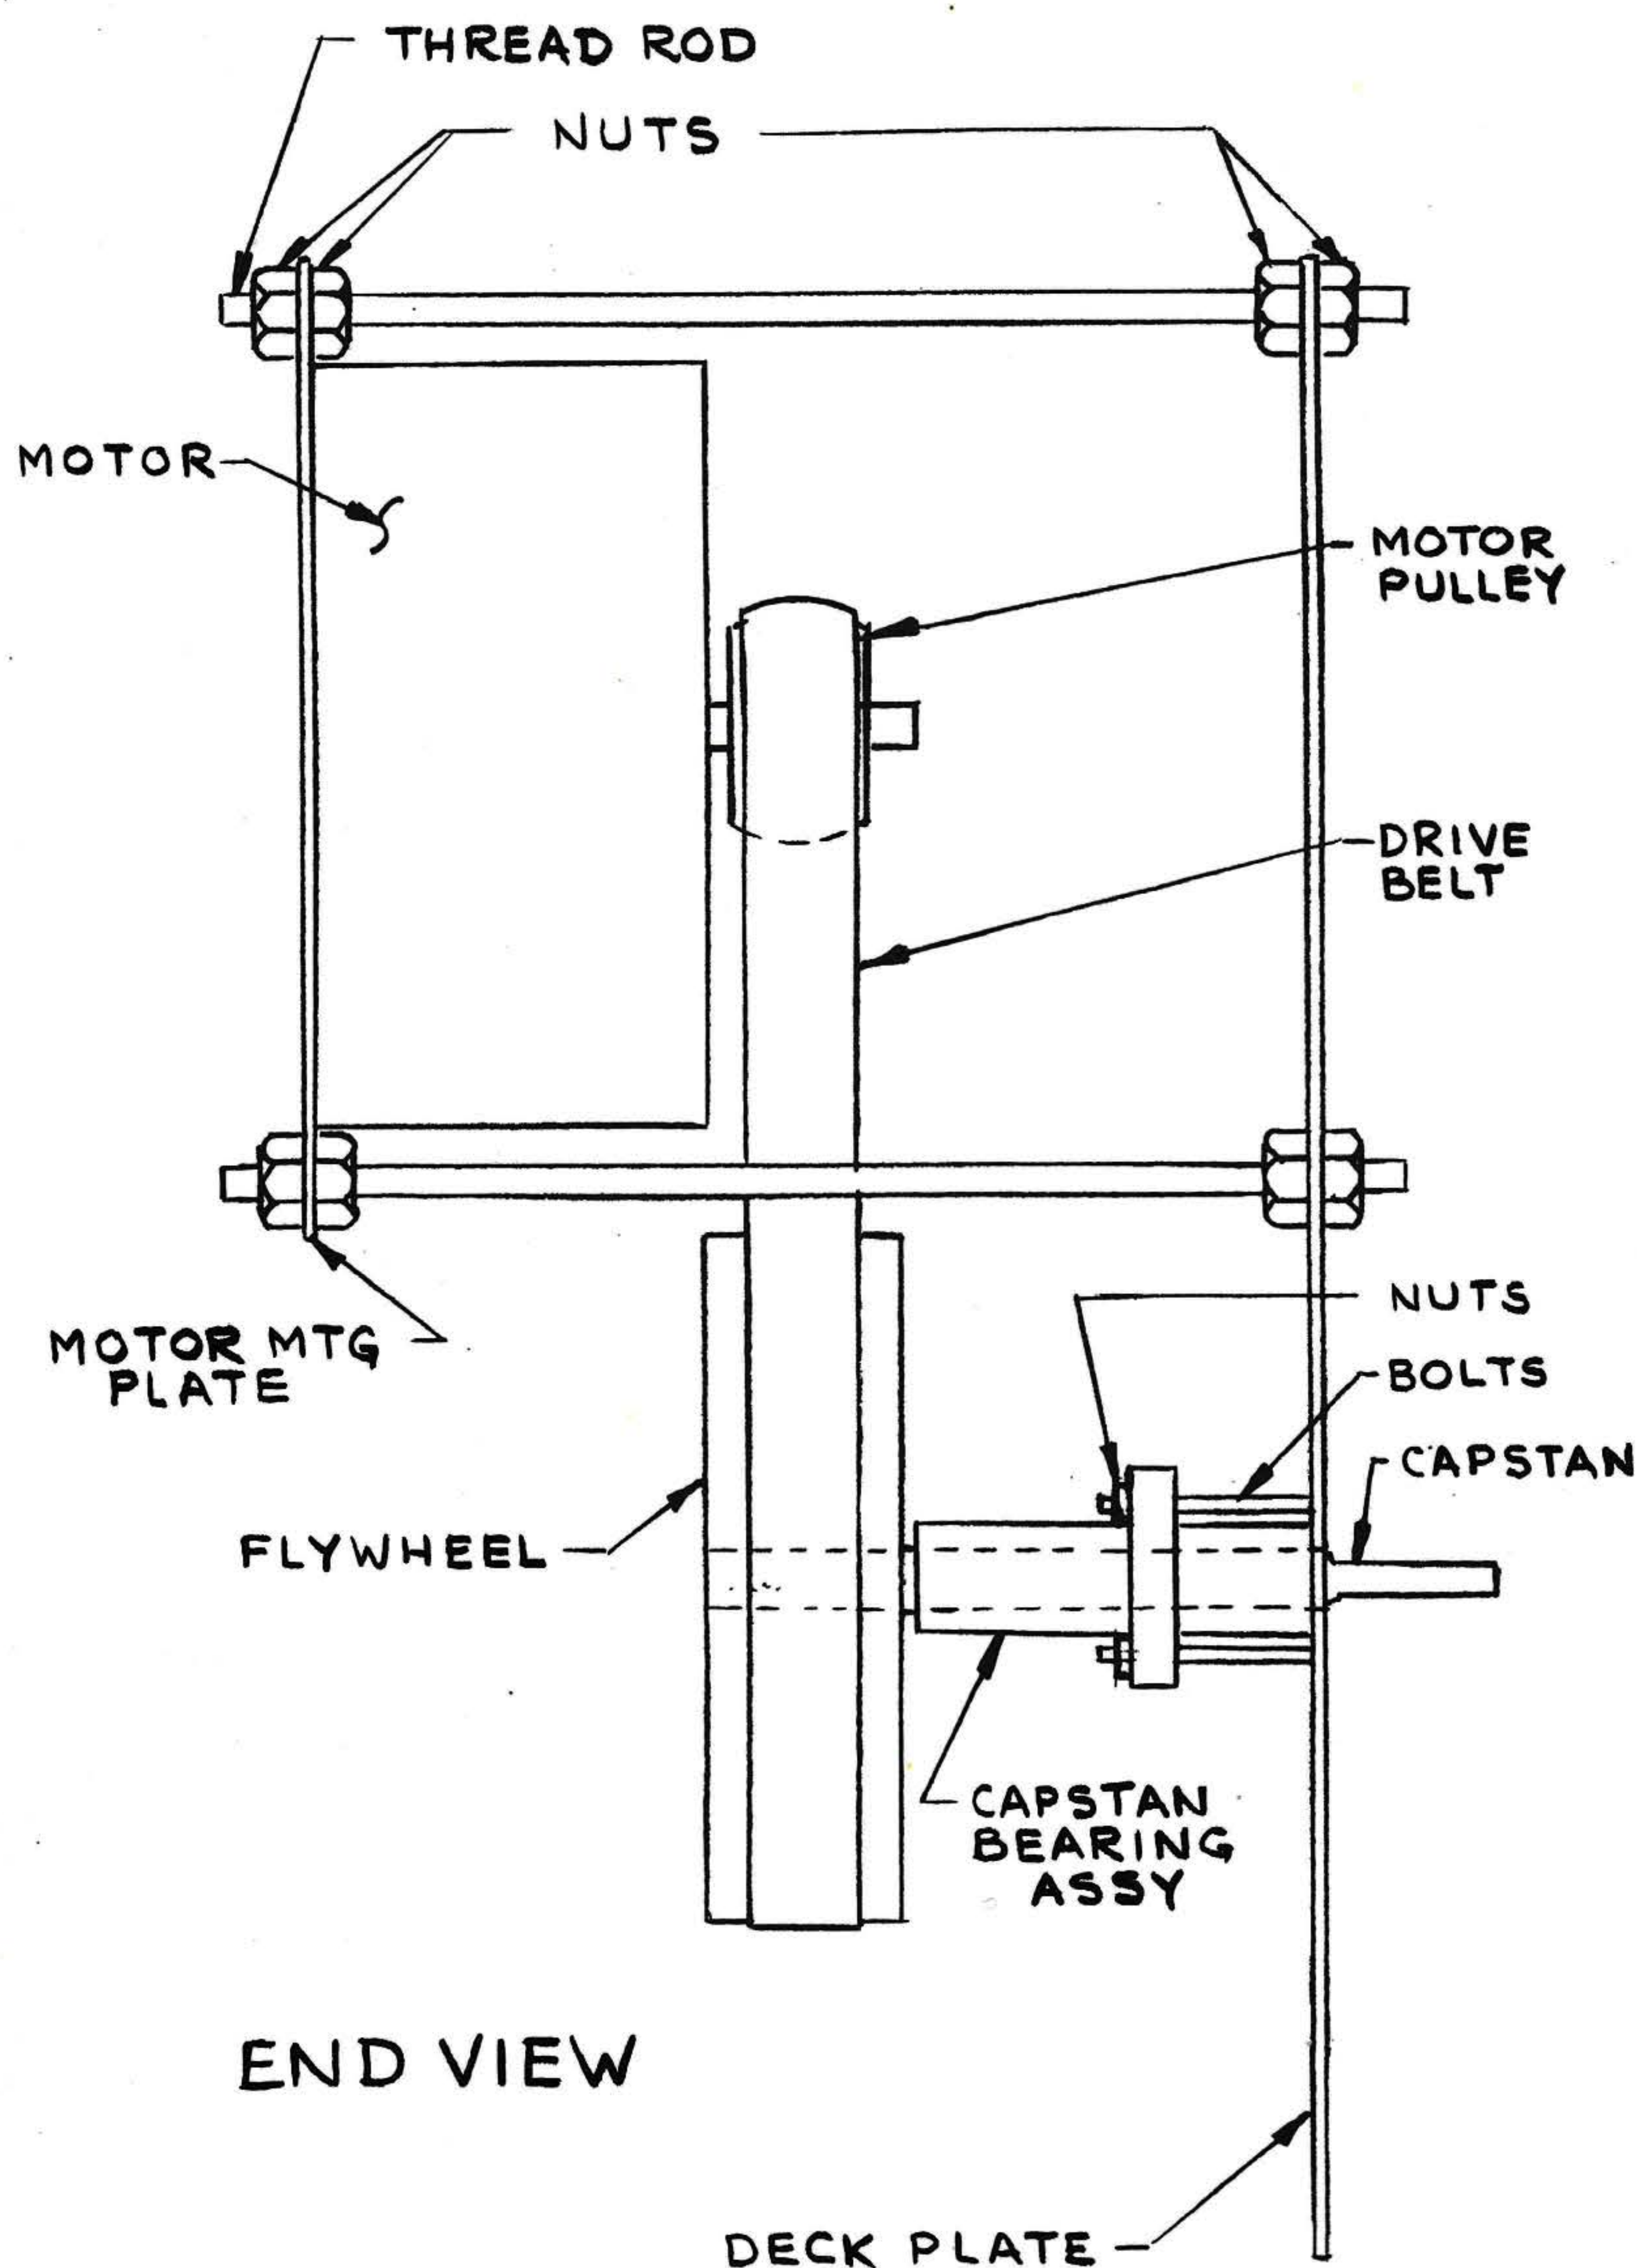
, above, is the motor and capstan mounting arrangement; Fig. 8 above, right, is a close-up of the pinch roller and head, guides, and capstan relationship. Fig. 9, below it, shows the pinch roller in its operational position.
